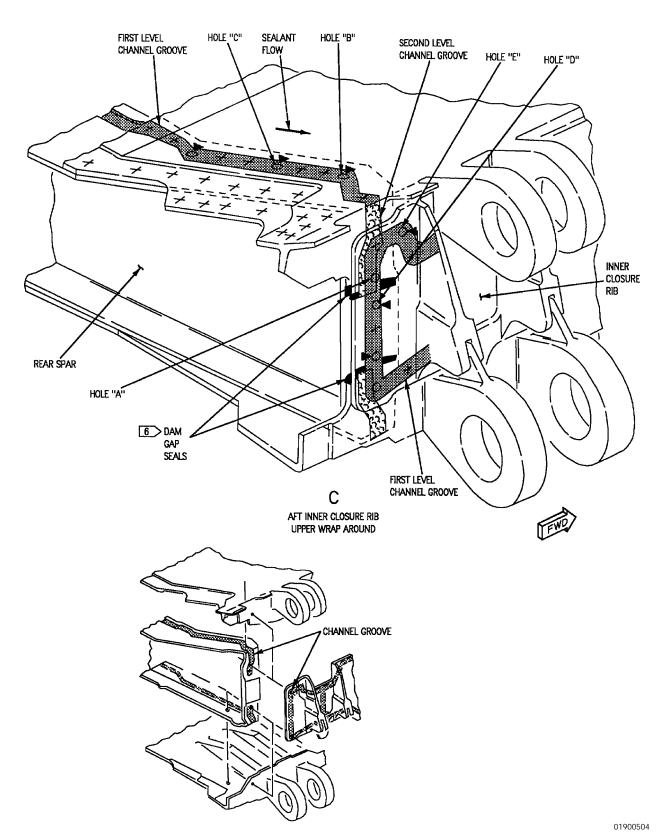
Closure Rib Channel Groove Seal Injection (Sheet 4)
